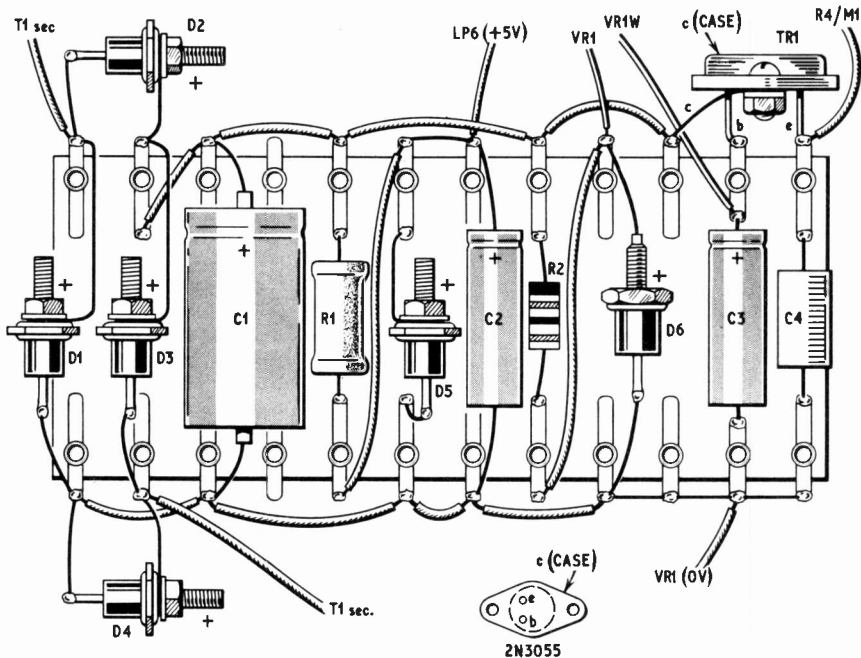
Assembly and wiring details of power supply unit. Both this and the mains transformer are mounted on the chassis base plate (see photograph below)
